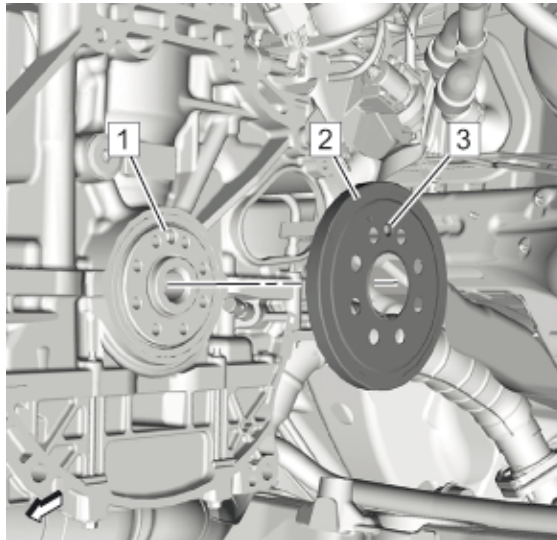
Crankshaft Position Sensor Reluctor Ring
